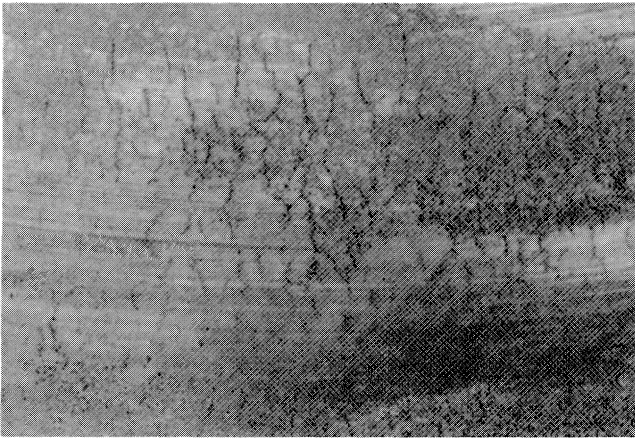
First Indication of Fatigue Failure-Fine Surface Cracks.
